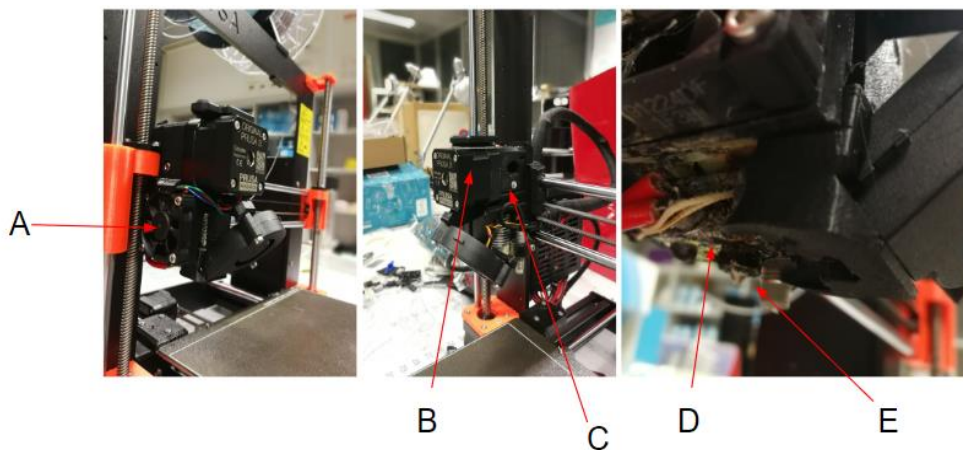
Some extrusion components: A - Fan; B - Stepper motor; C - Gears; D - Heating block; E - Nozzle.
